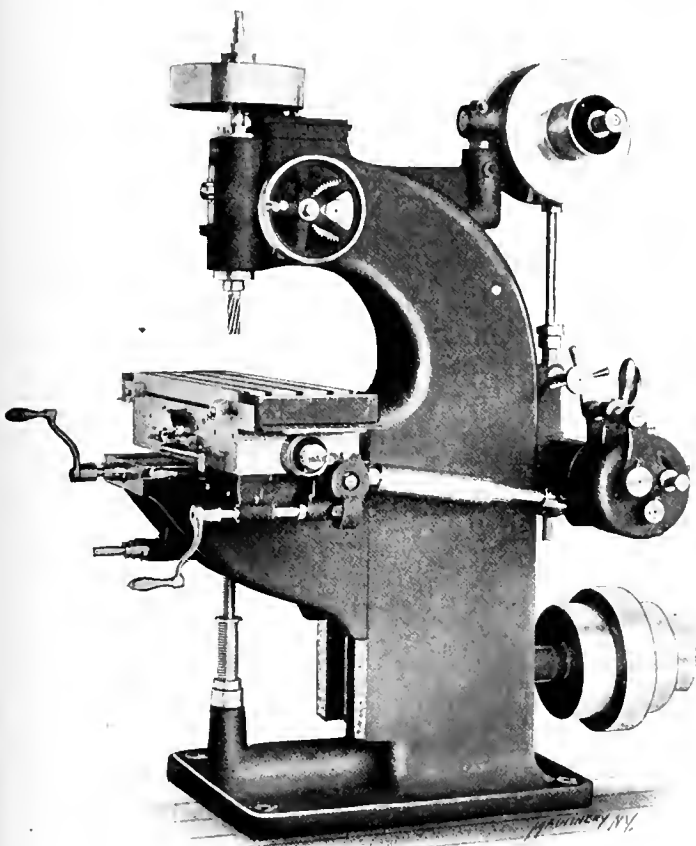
Side View of Friction Feed Vertical Milling Machine, built by Becker Milling Machine Co., Hyde Park, Mass.
